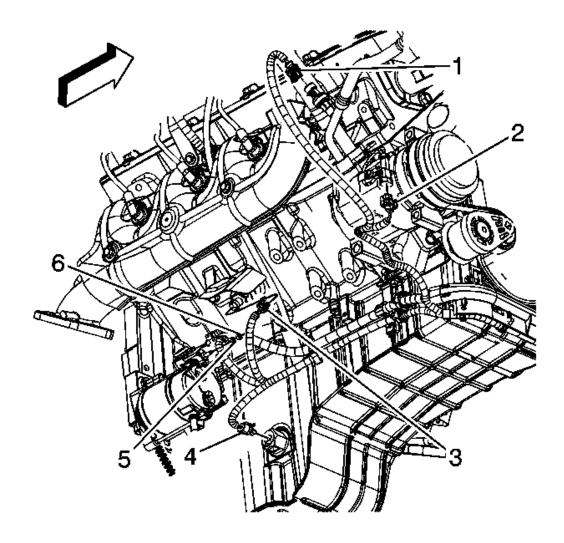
View Of Oil Level Sensor Courtesy of GENERAL MOTORS CORP.
